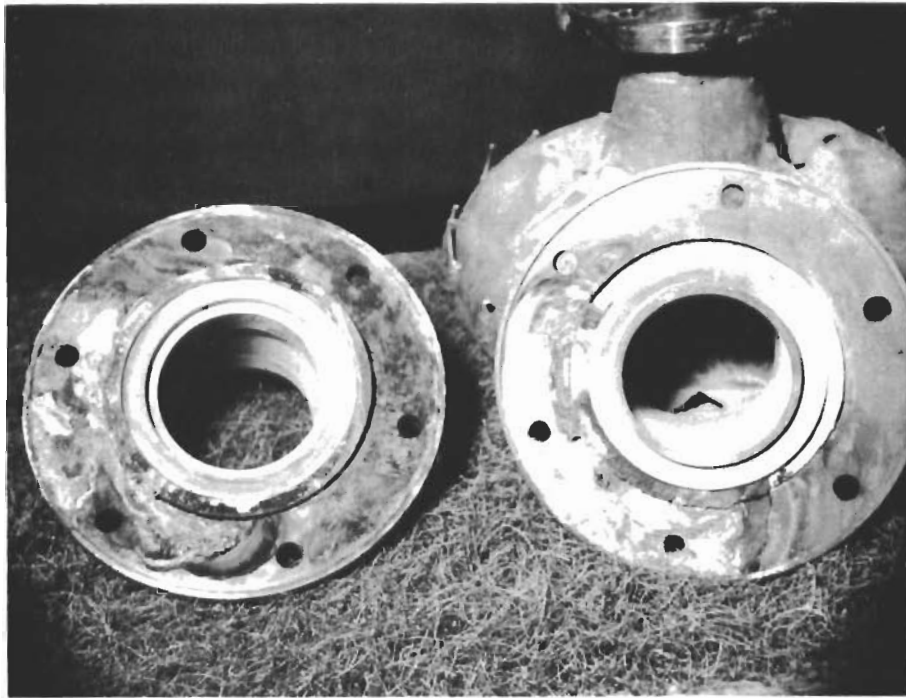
A Specimen, Type II, Disassembled Conoseal Joint
